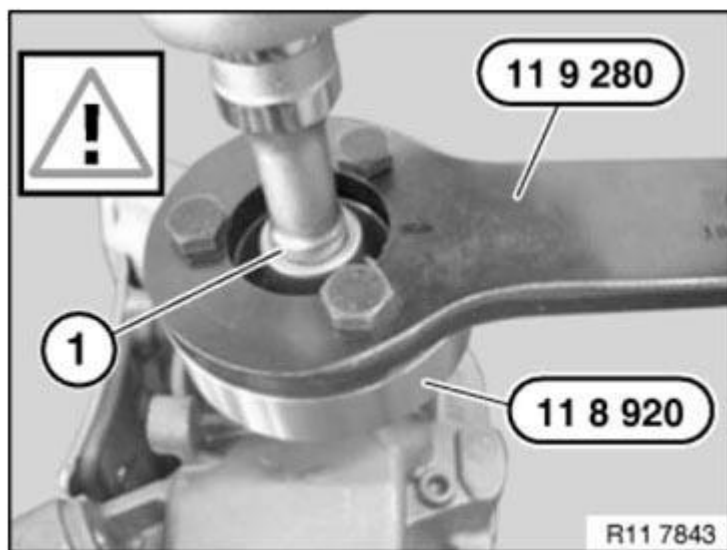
Positioning Special Tool 11 8 920 On Sprocket
